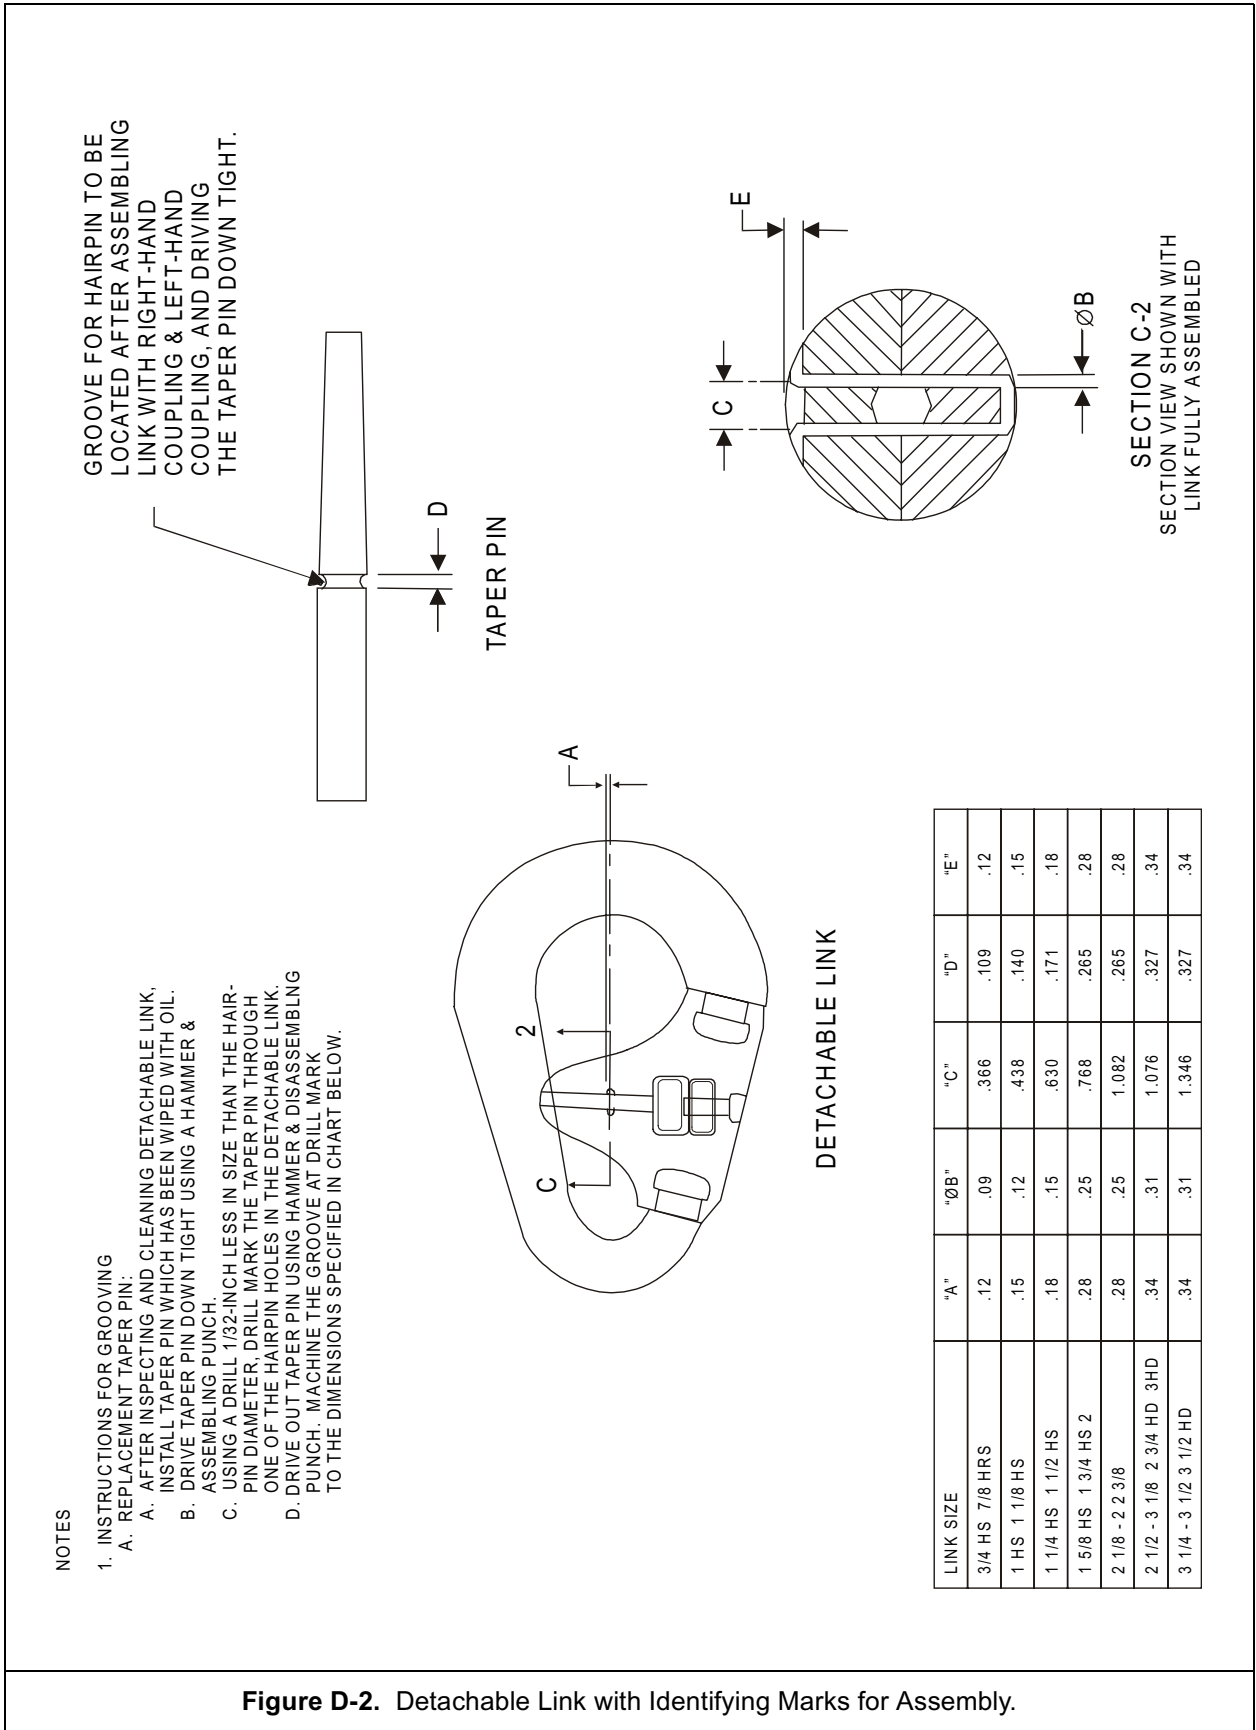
Detachable Link with Identifying Marks for Assembly.
